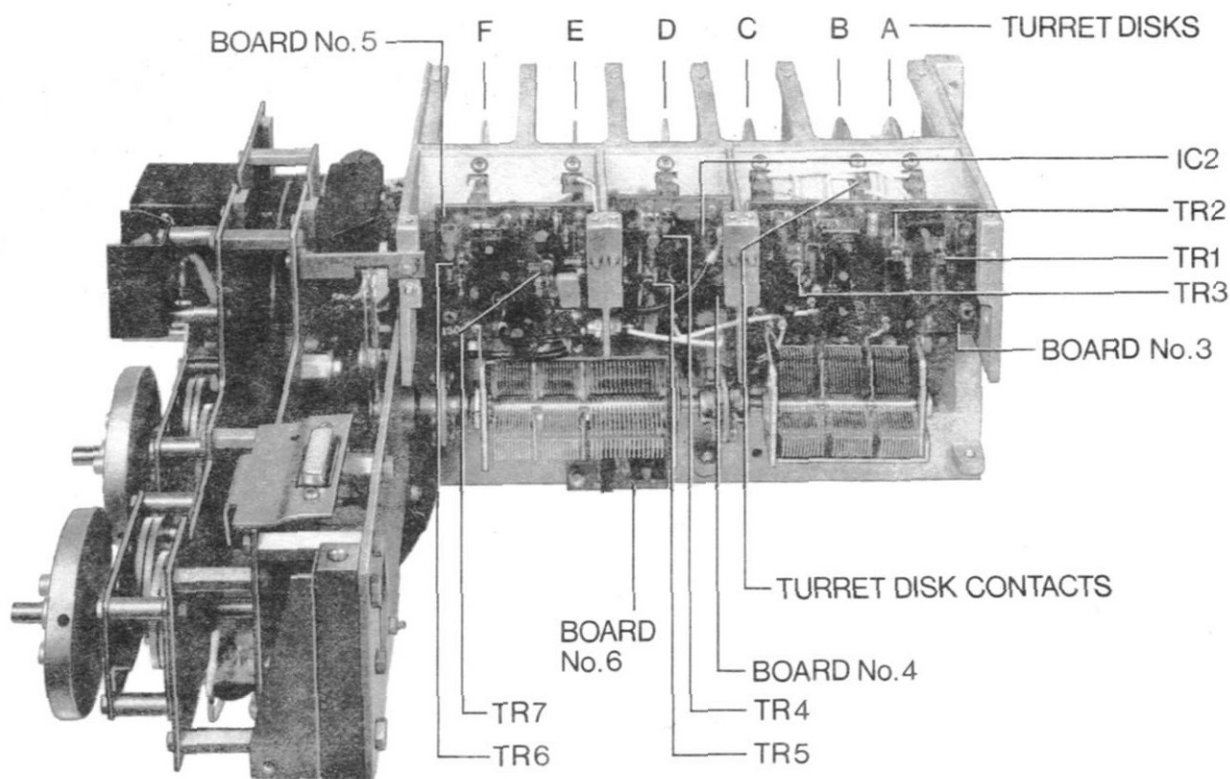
RF Assembly showing location of printed circuit boards.
